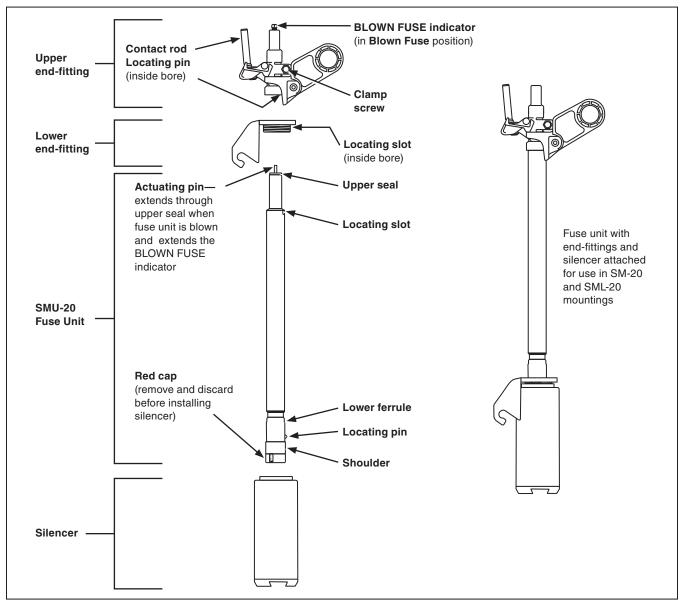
An SMU-20 Fuse Unit with end-fittings and a silencer for use in indoor SM-20 and SML-20 Power Fuse mountings.
